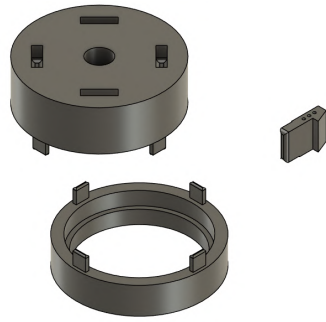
3D Models of Latch, Front and Back Motor Covers
